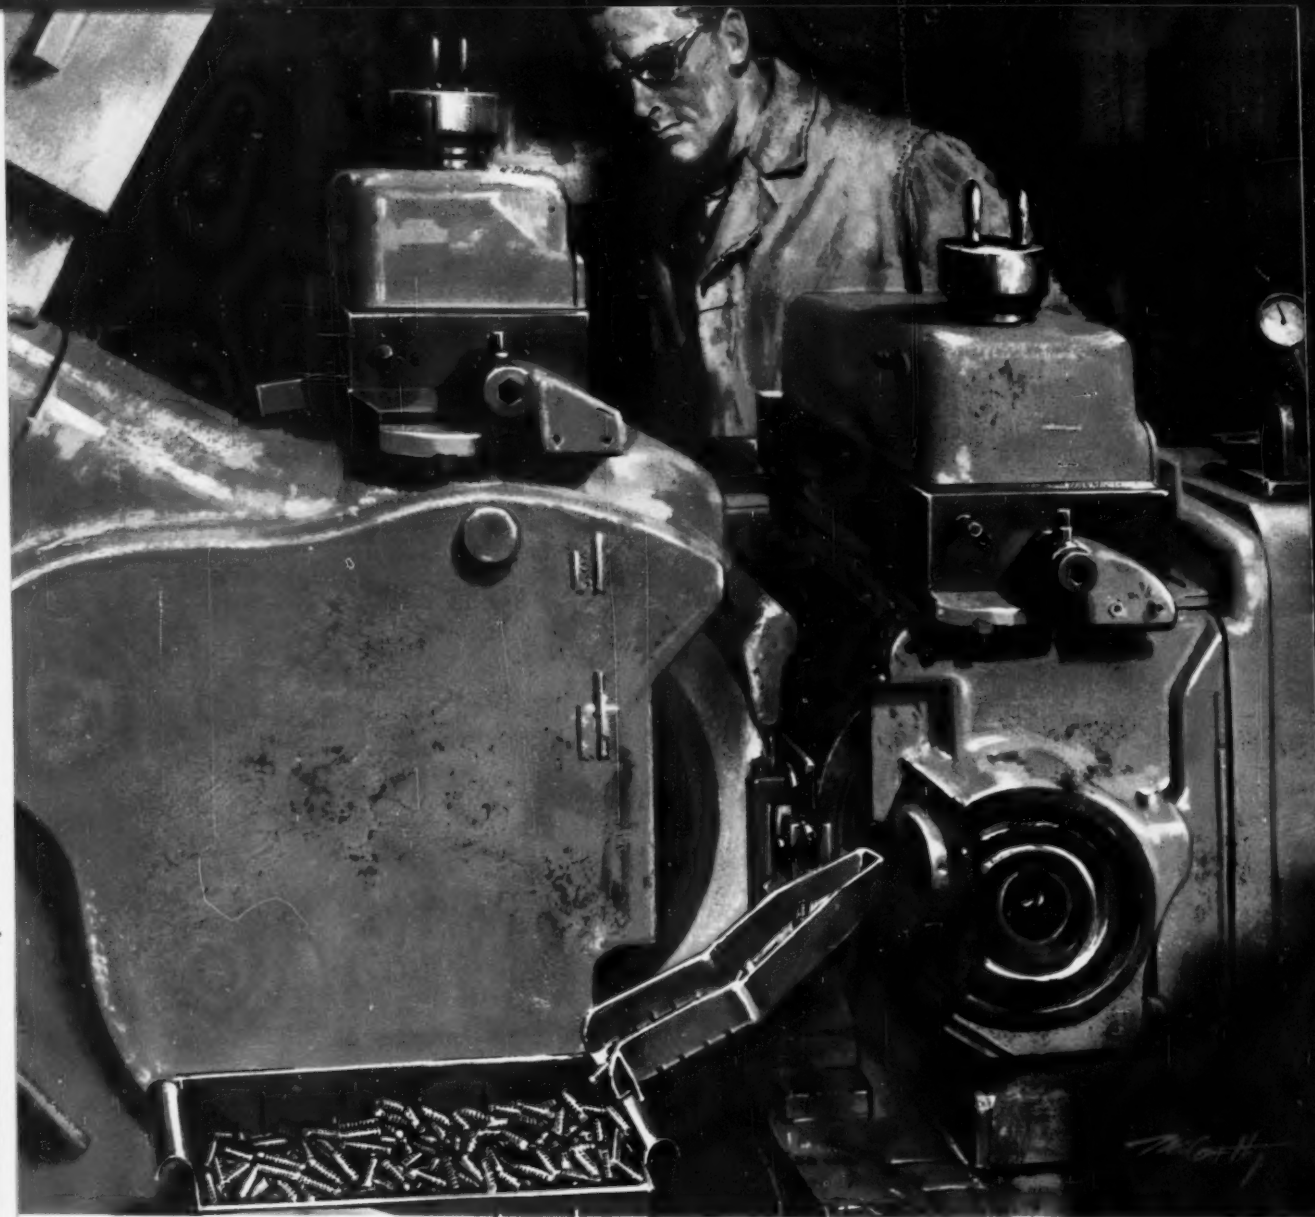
One of three automatic, valve-spring retainer assembling stations of machine shown in Fig. 1
